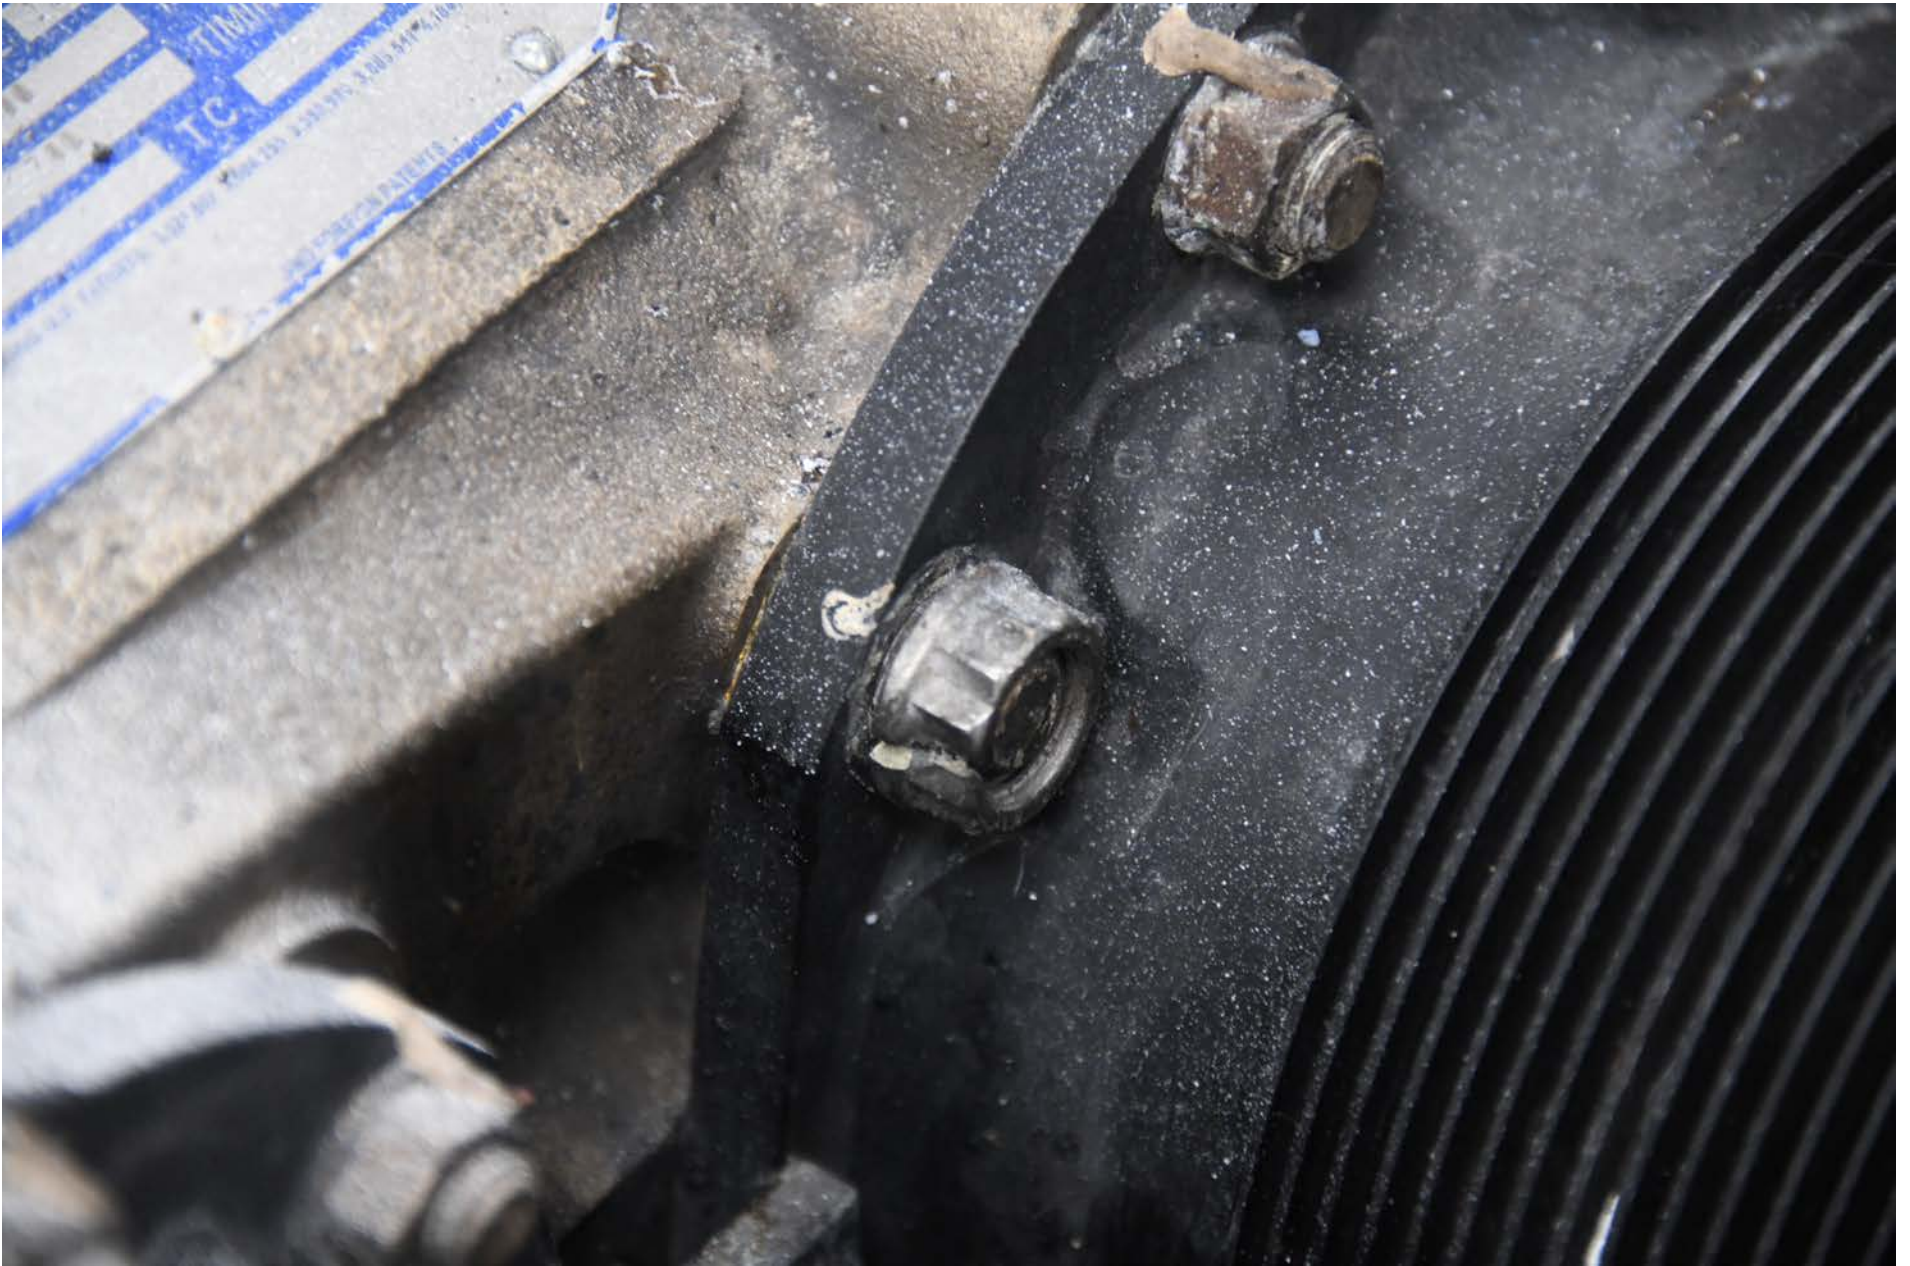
Close up view of an engine cylinder base nut. The nut is split consistent with being exposed to heat.
